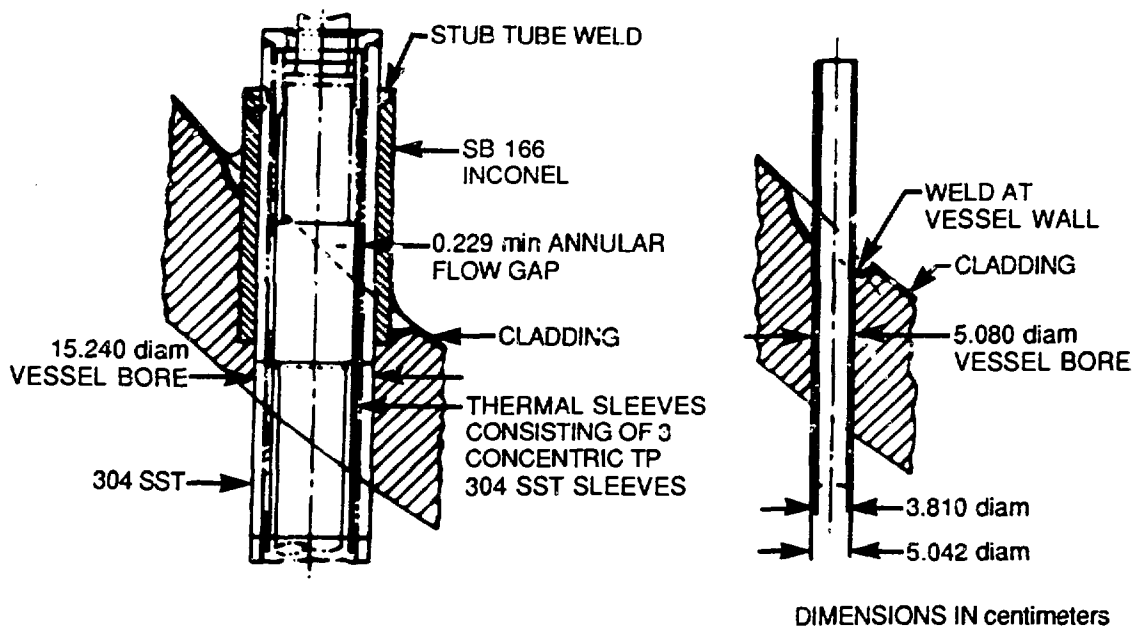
The BWR control rod drive mechanism assemblies are held in place by stainless steel-to-Inconel welds at the upper ends of the stub tubes whereas the in-core instrument tubes are supported by stainless steel-to-Inconel welds at the vessel wall.
